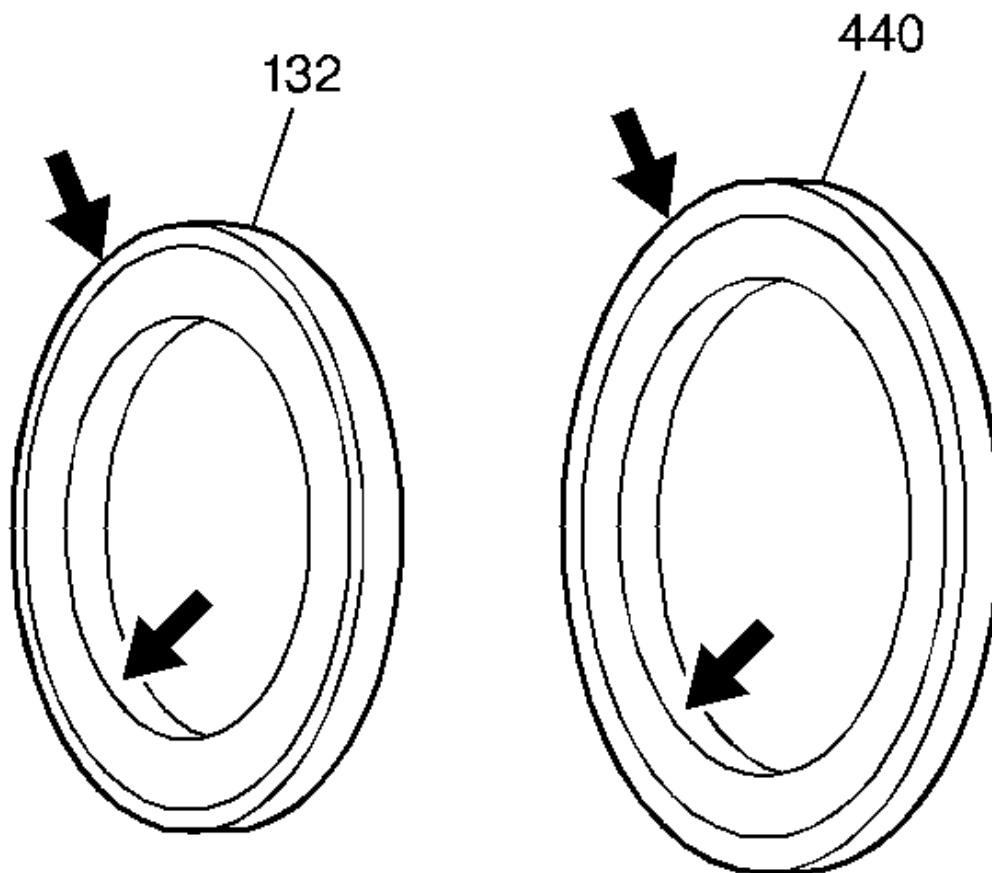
View Of Drive & Driven Sprocket Thrust Bearing
